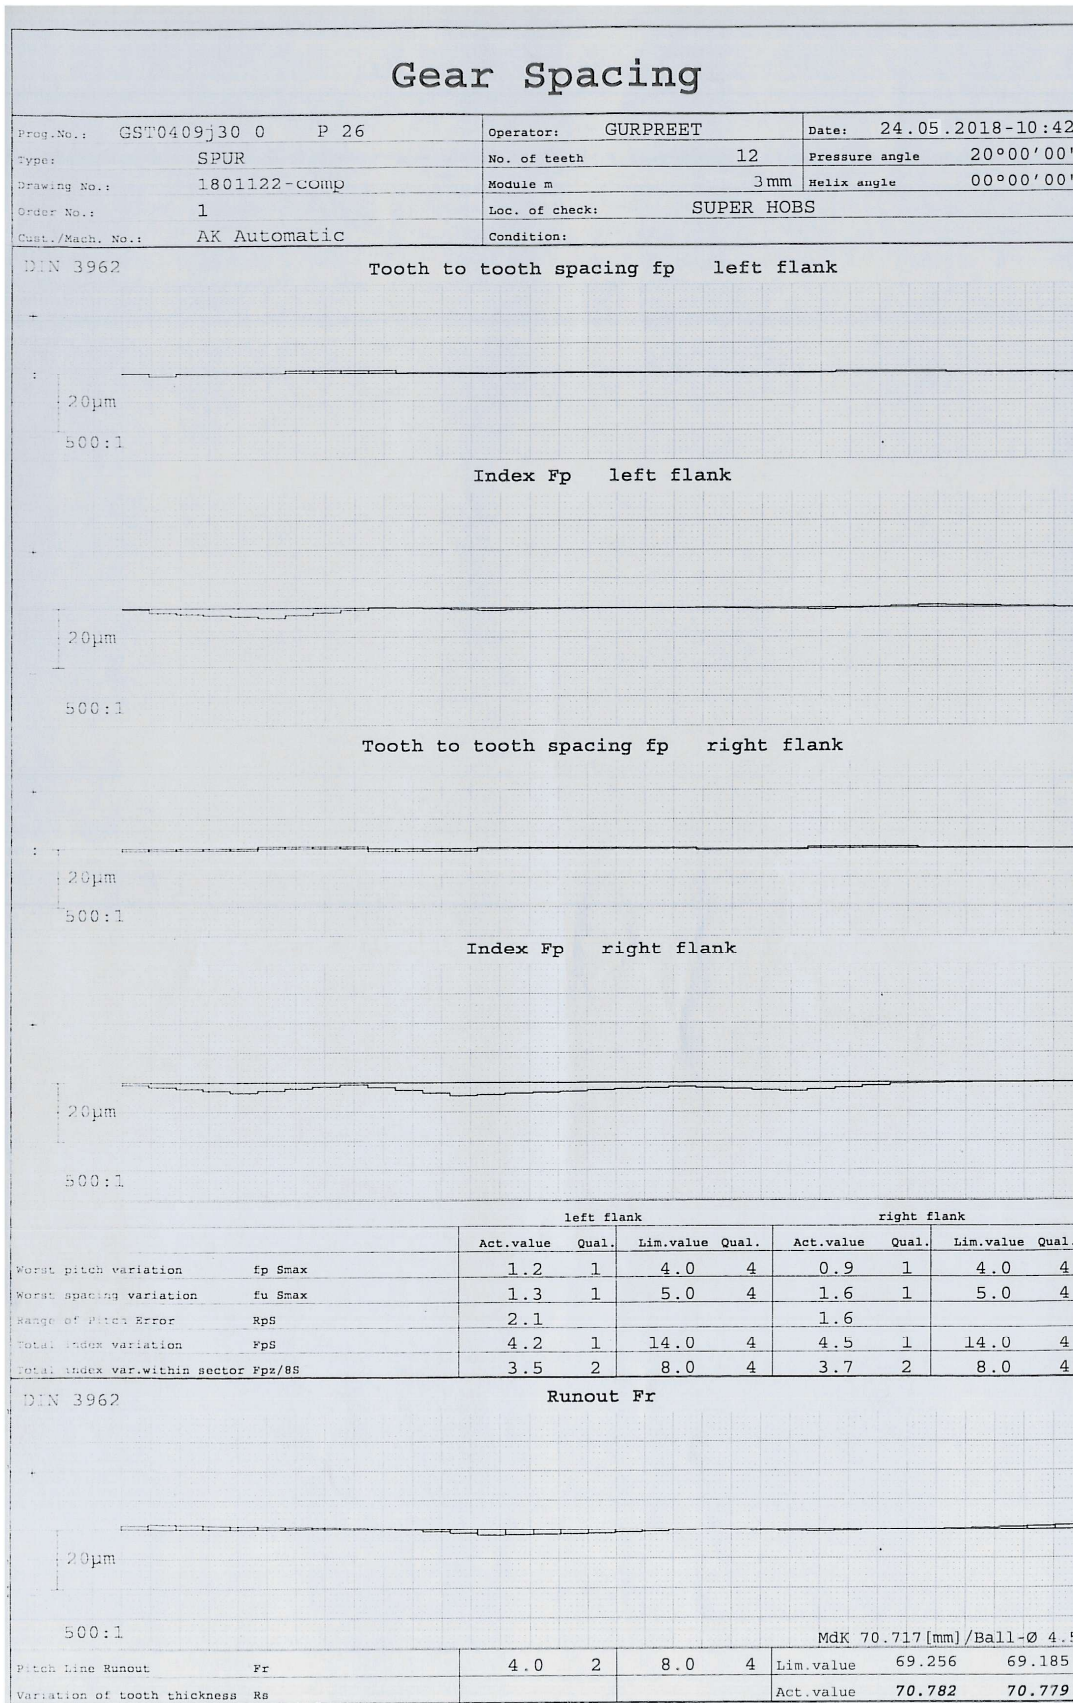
Spur gear runout in DIN 4 after the MR gear profile finishing process
